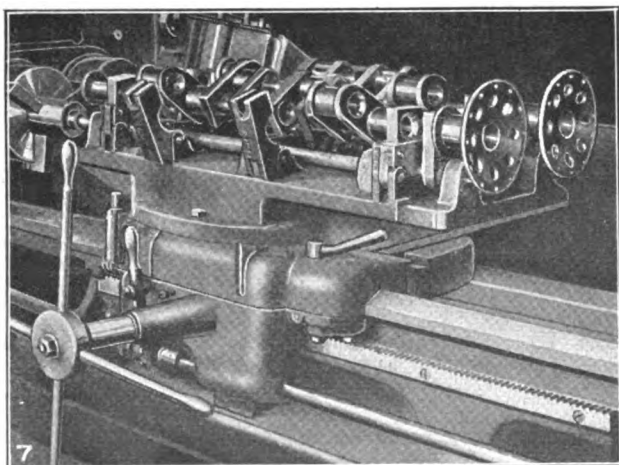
FINISH BORING THE CRANKSHAFT. FIG. 8. GRINDING THE CRANKSHAFT
